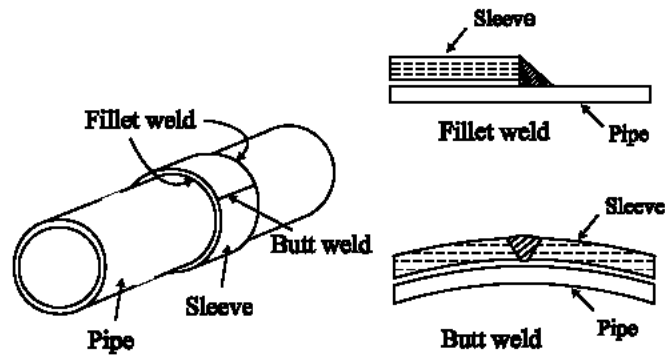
Schematic illustration of sleeve-repair welding of pipeline
